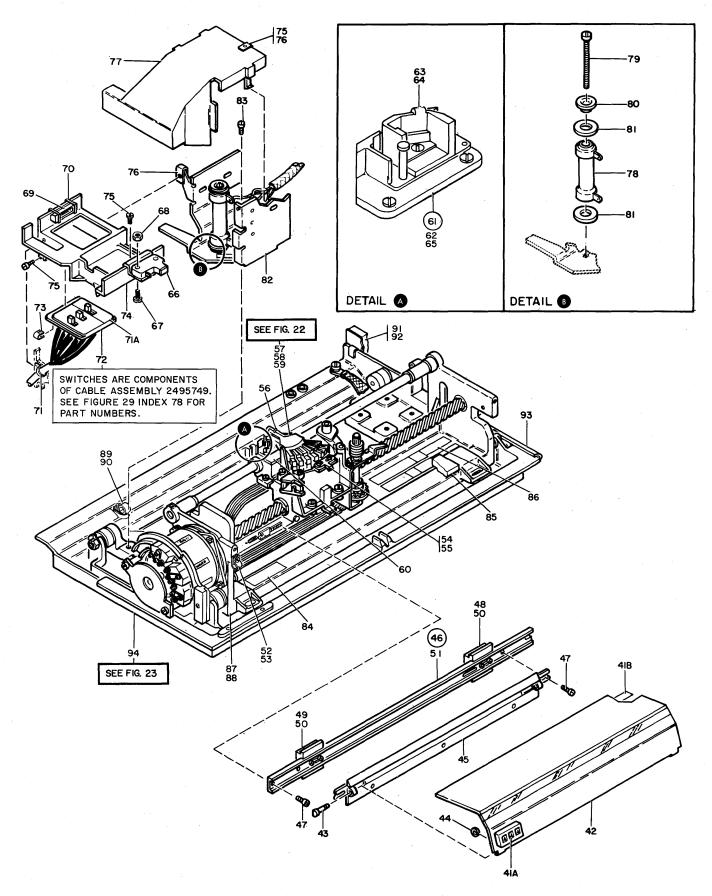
PRINTER FINAL ASSEMBLY. SHEET 2 OF 2. INDEX NOS. 41A-94.
